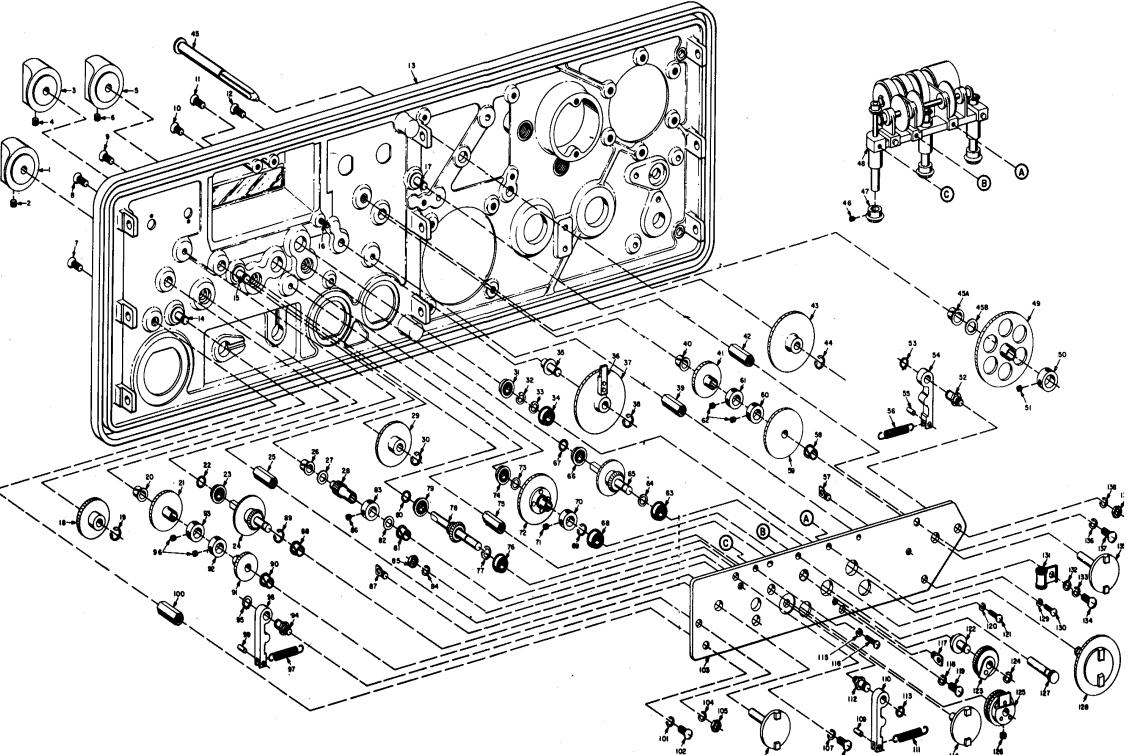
Radio Receiver - Transmitter RT-671/PRC-47. Frequency Selection Mechanism (A8A4.A1) Exploded View.
